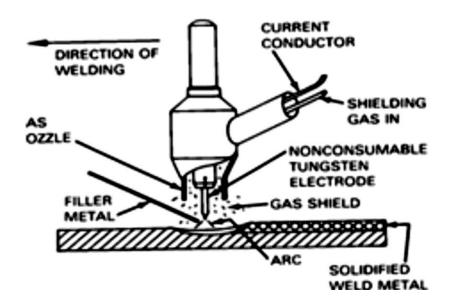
Schematic set-up for gas tungsten arc welding process
